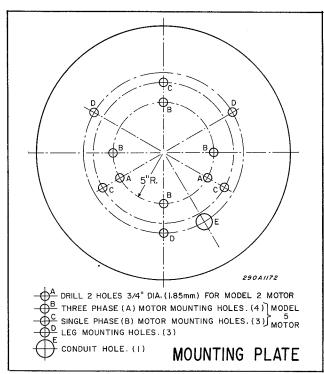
Mounting Plate Drilling Detail. mounting plate rests on the top of the pole (refer to CAUTION in paragraph 3-3.B.1.).
